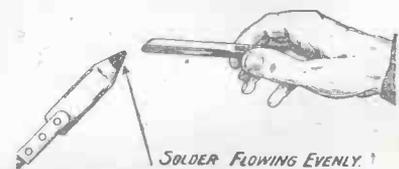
Showing how the solder will run freely when the iron has been cleaned before tinning.
